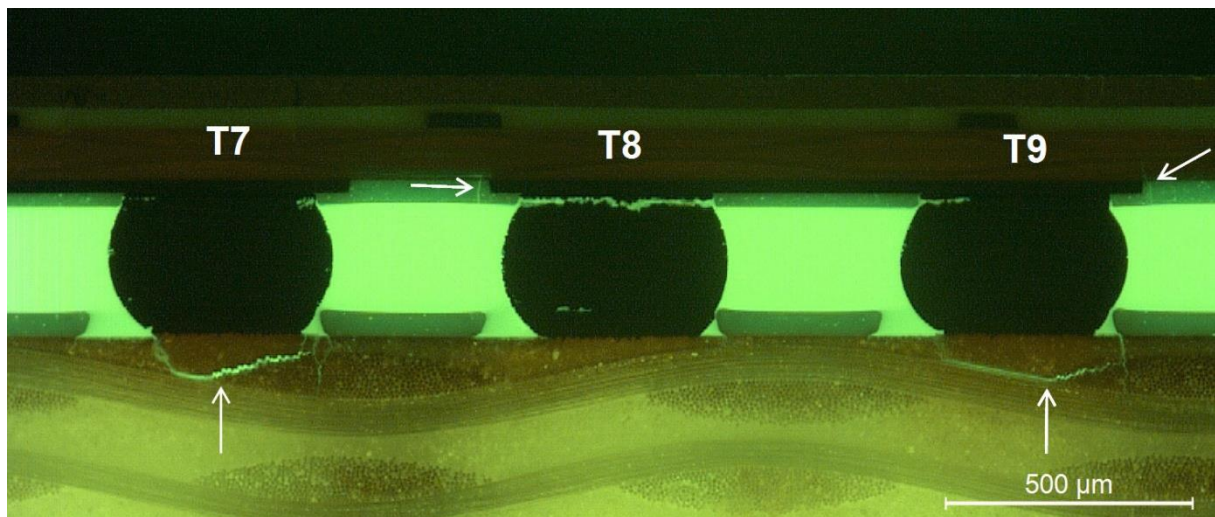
Cross-sections of solder joints T7-T9 in the second row of solder joints to a BGA208 with SAC305 solder joints showing cracks in the PCB and BGA laminates.
